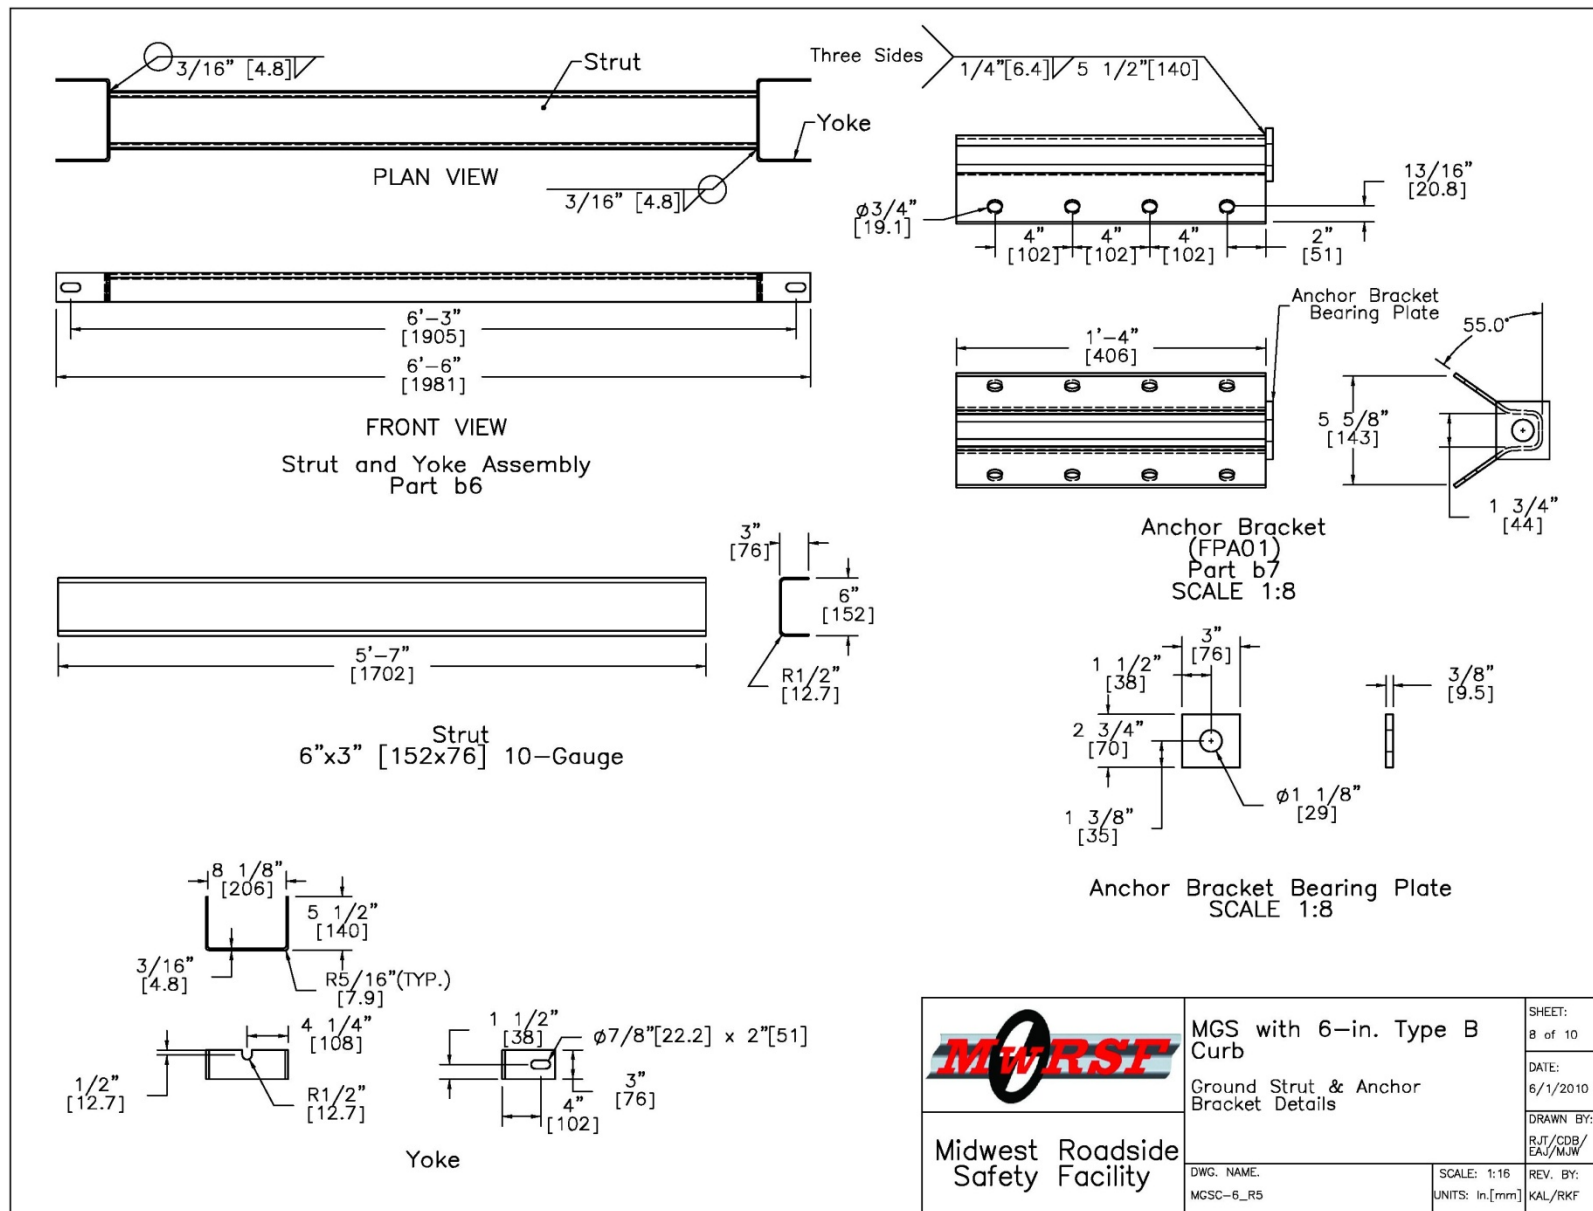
Ground Strut and Anchor Bracket Details, Test No. MGSC-6
